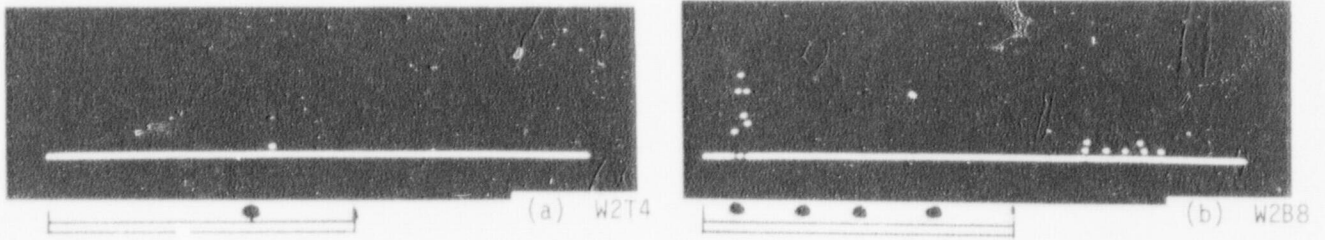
DETECTION OF 0.5" SLAG INCLUSIONS DURING SUBMERGED ARC WELDING OF A533B PRESSURE VESSEL STEEL
